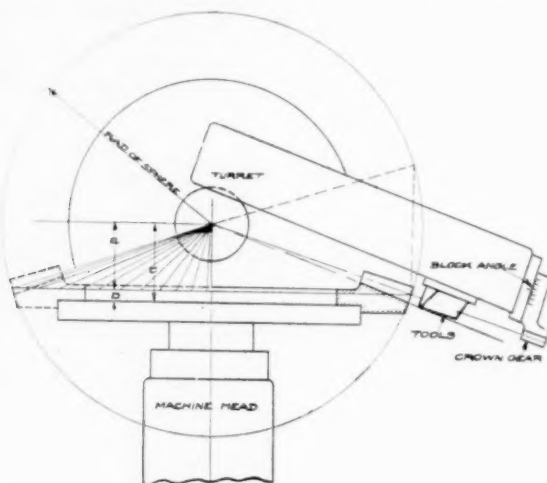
BACK CONE DISTANCE ON GEAR-TOOTH GENERATOR
